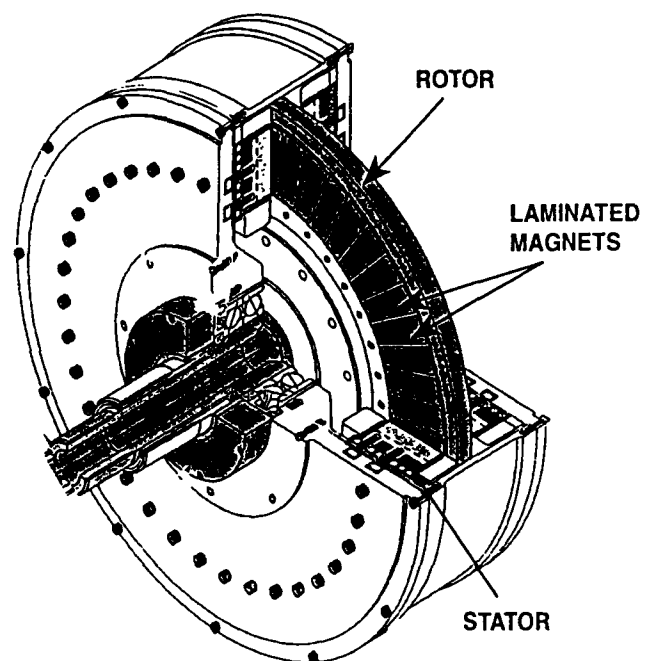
Cutaway view of a brushless, PM axial-field motor
